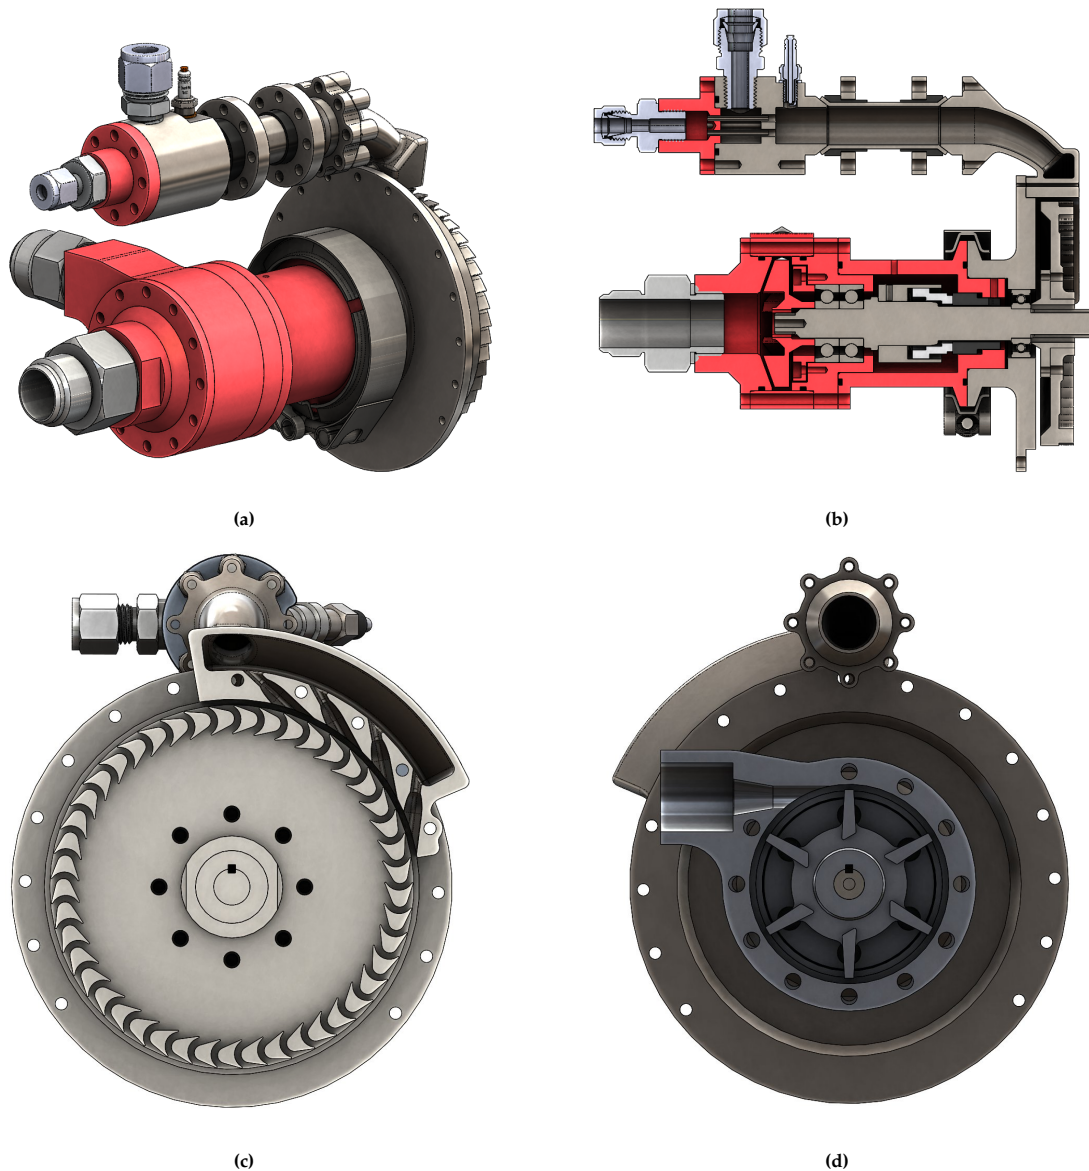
CAD renders of Mario's amateur turbopump design. a) Isometric view, b) Cross sectional view, c) Turbine cross sectional view, d) Pump side cross sectional view. Images courtesy of Mario Hernández Méndez [38]
